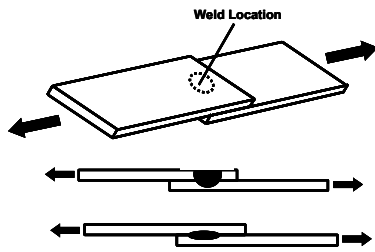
Tension-shear testing of spot joints. Block arrows indicate loading direction.
